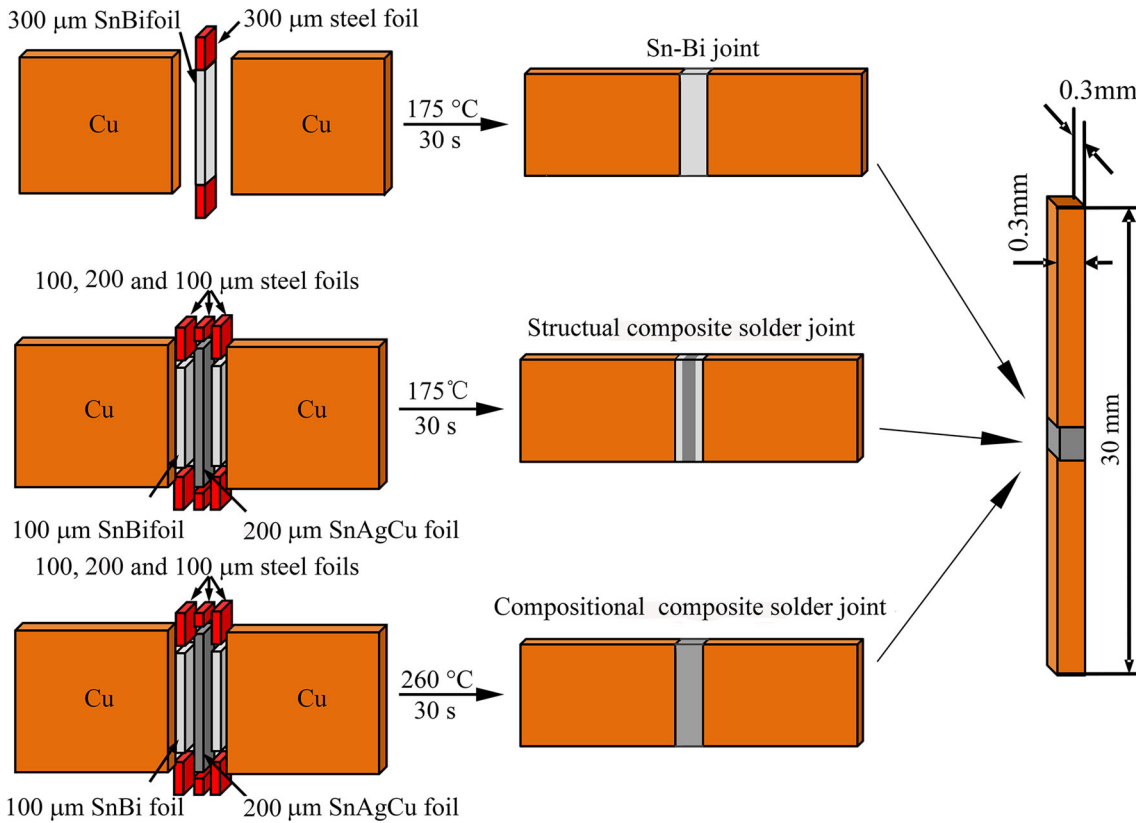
Schematic on preparation of line-type Cu/solder/Cu joints.
